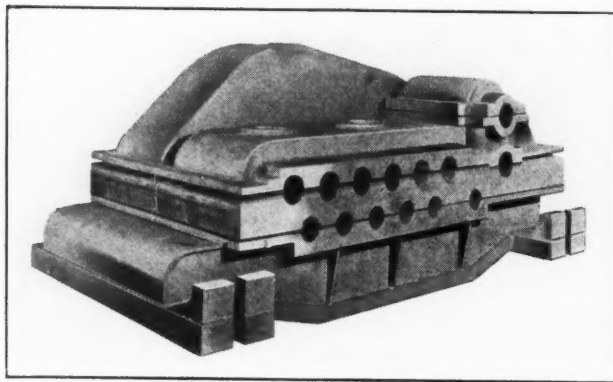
Gear-case of Roller Leveler Shown in Fig. 2
